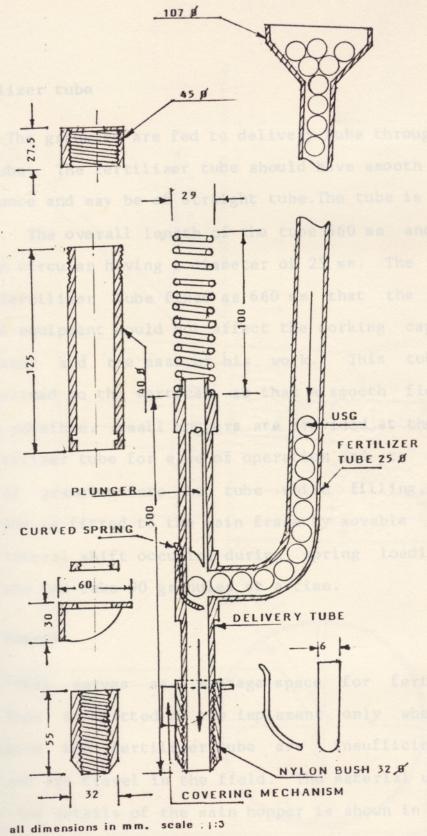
DELIVERY TUBE ASSEMBLY AND ITS EXPLODED VIEW.
